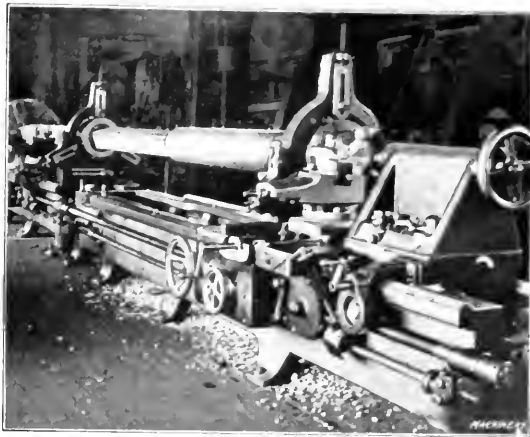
Turning a Special Shaft on Two Pond 36-inch Lathes
